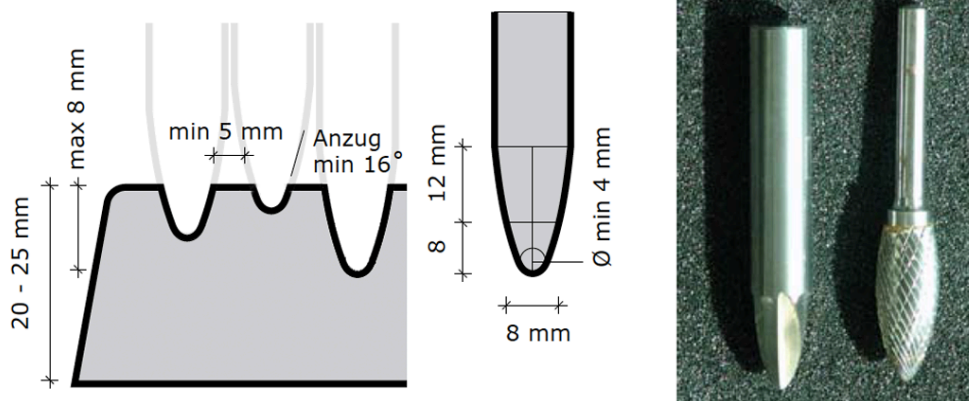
Tooling strategy: Dimensions for tools based on sand casting parameters (ref: K.Strehlke)
